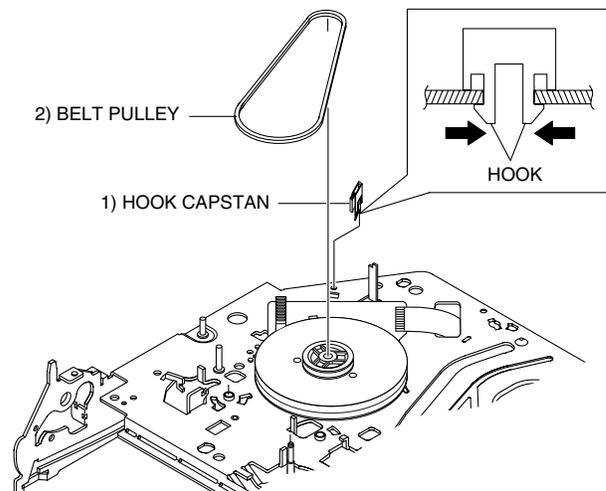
Hook Capstan, Belt Pulley Removal
